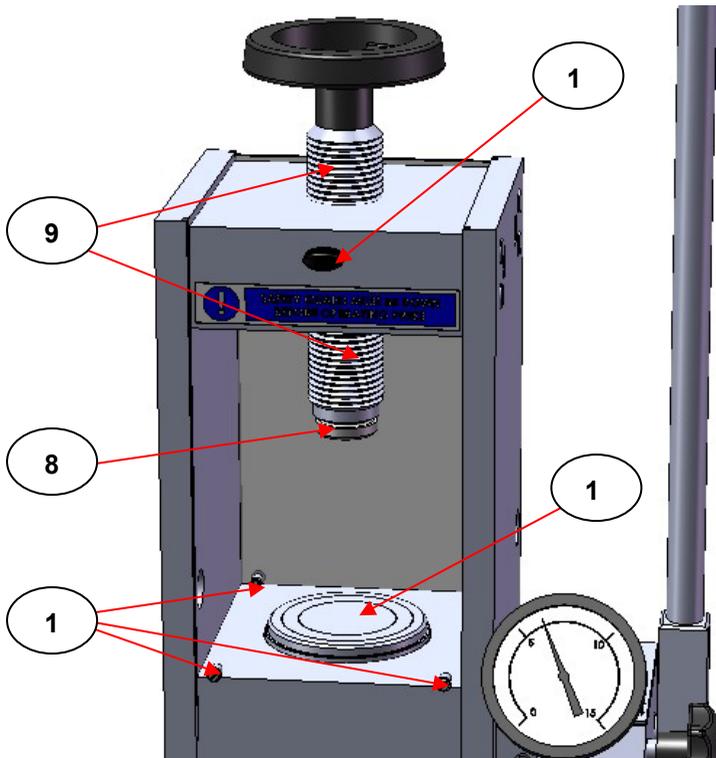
Lead Screw and Top Bolster Pressing Face of the Atlas™ Manual Hydraulic Press
